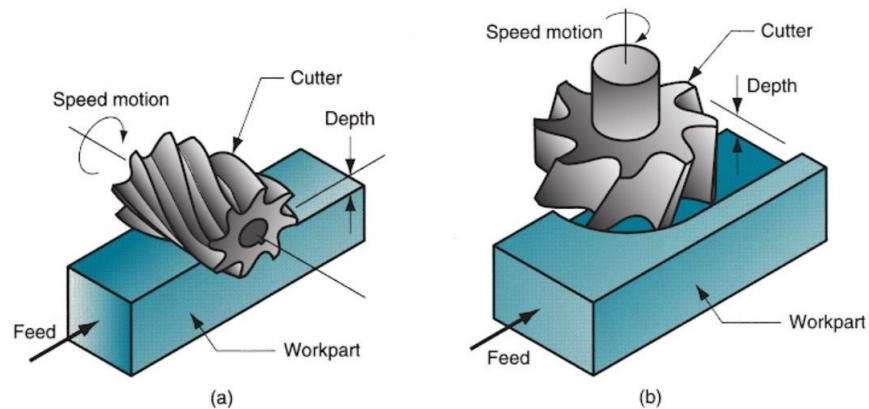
Types of milling processes: (a) peripheral milling and (b) face milling [40]
